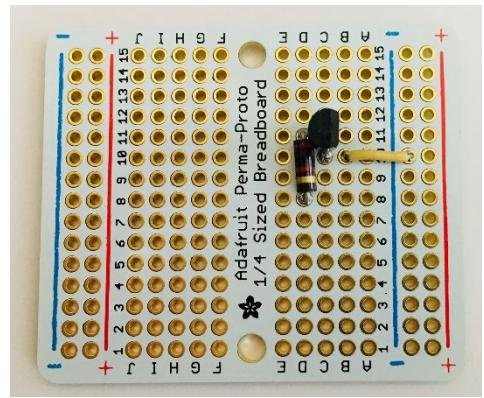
Breadboard with resistor, transistor, and jumper wire soldered
